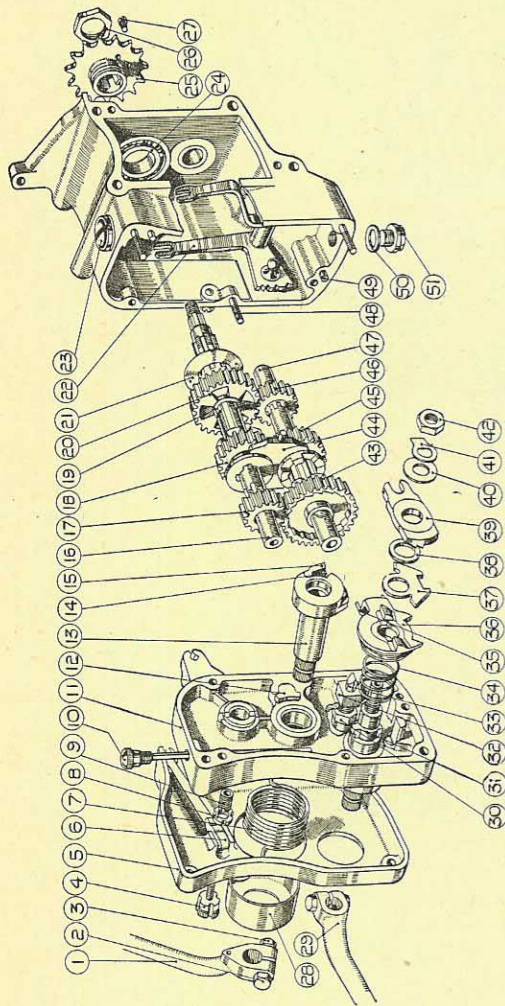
EXPLODED VIEW OF GEARBOX, MARK 10D UNIT.
